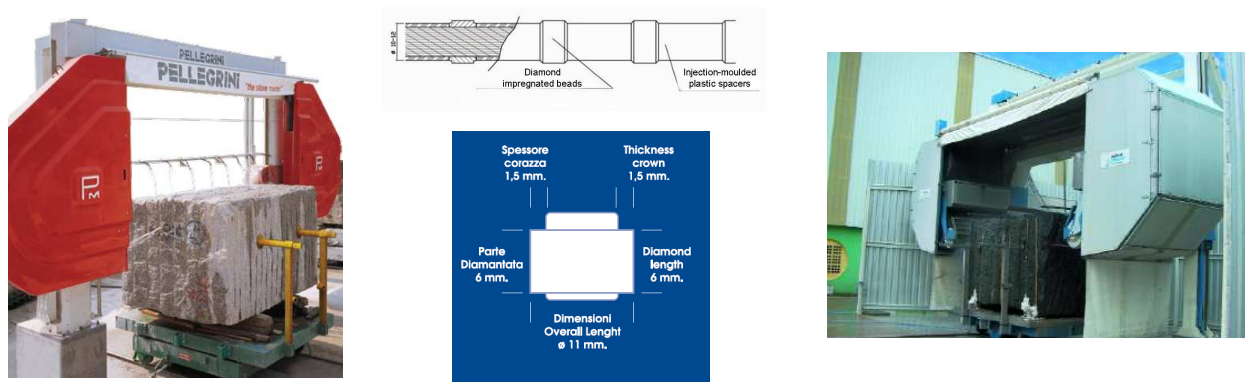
View of a single wire machine (left), a cutting diamond wire (centre) and a multi-wire machine (right).
